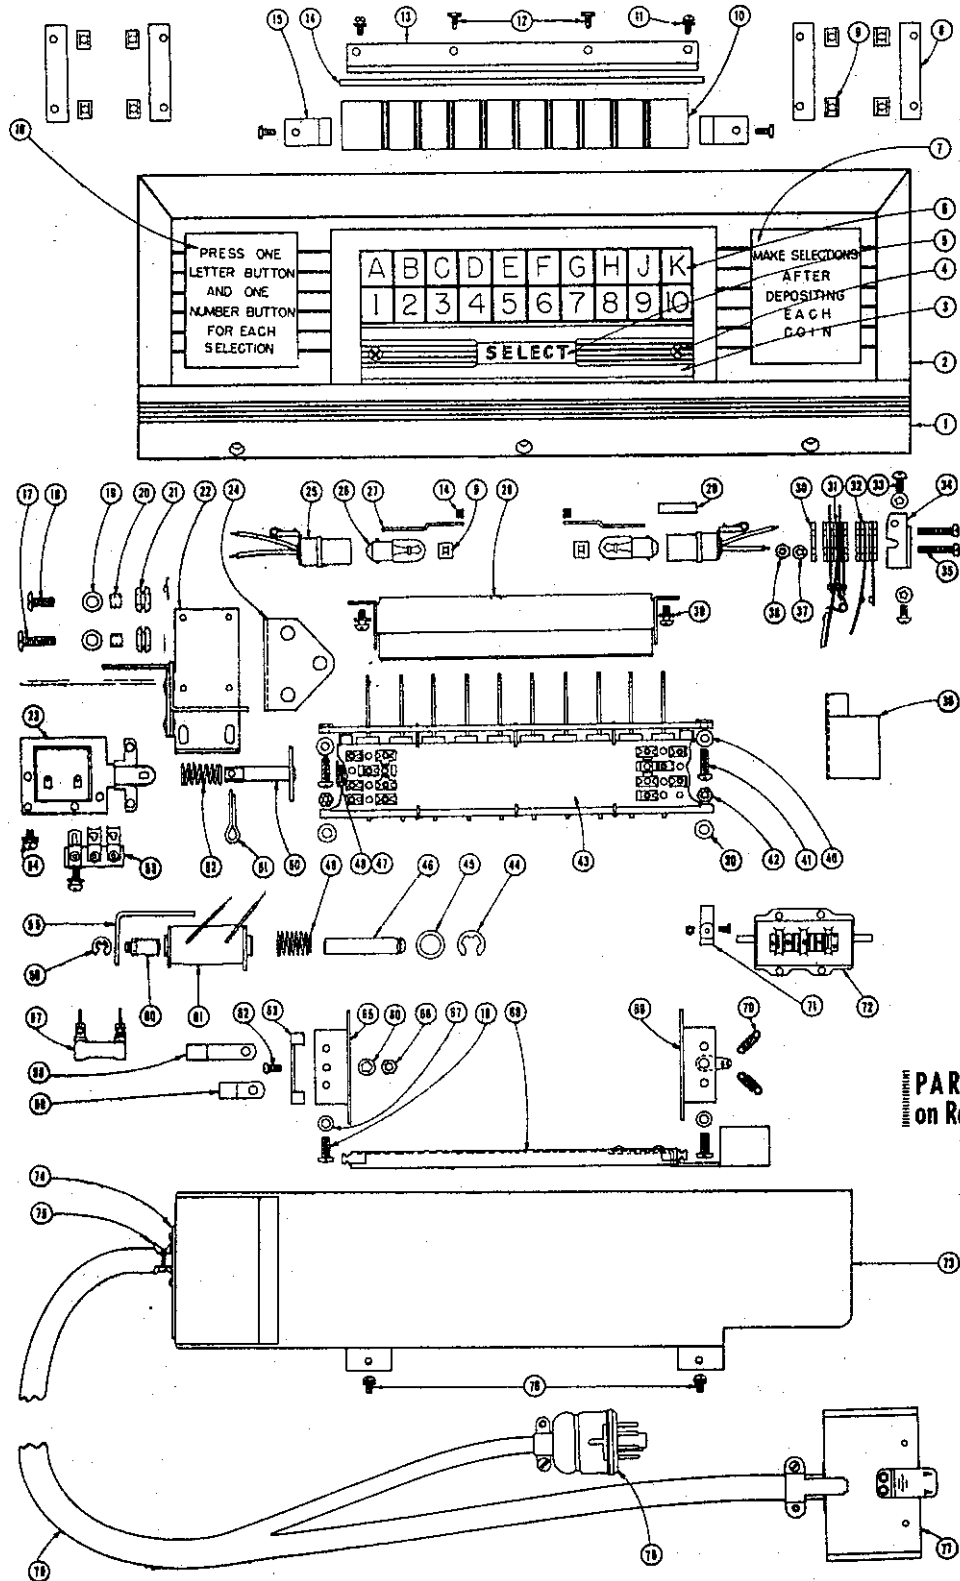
ELECTRICAL SELECTOR ASSEMBLY
